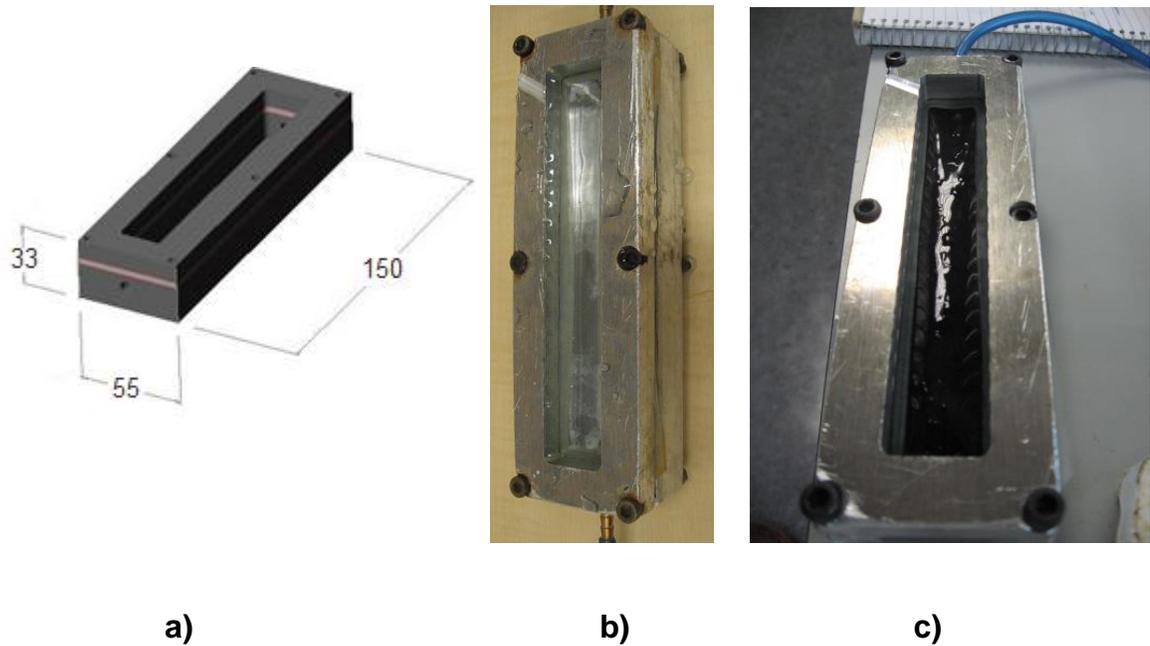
Trench fixture a) Design Nafion sheet b) untreated and c) treated sheet
